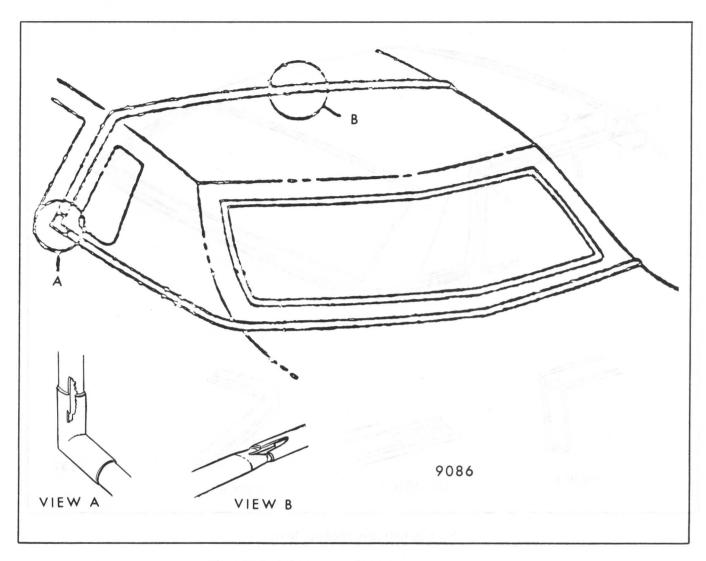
Typical Upper Roof Molding without Vinyl Lace
